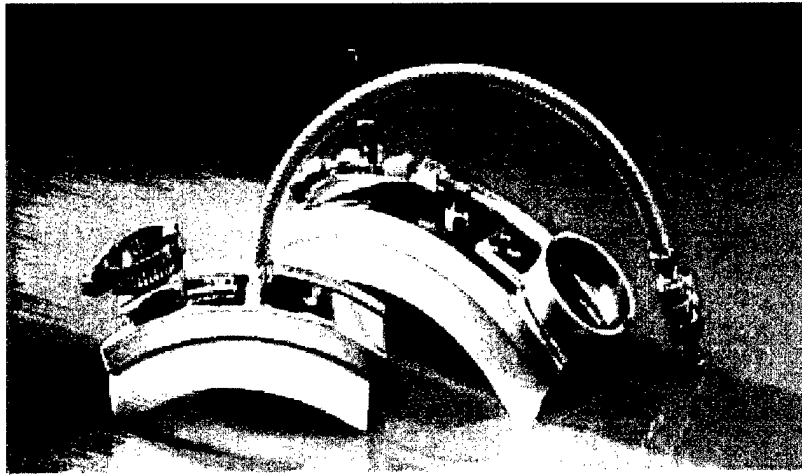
Pre-fabricated trailing shields for titanium pipe welding.
